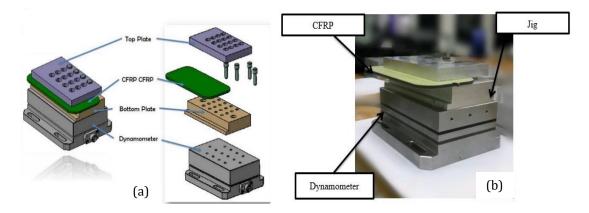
(a) CAD view of the jig with CFRP plate, (b) final fixture assembly preparation.
